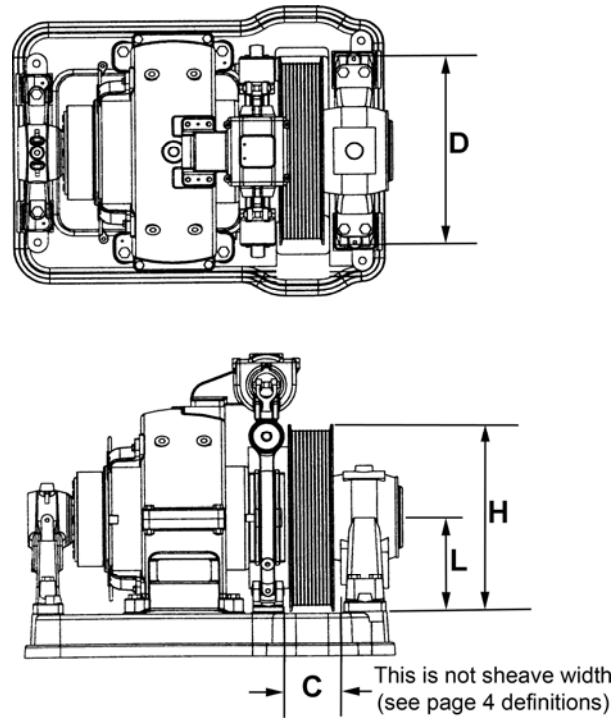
Gearless Machine with inboard drive sheave next to Bearing Stand
